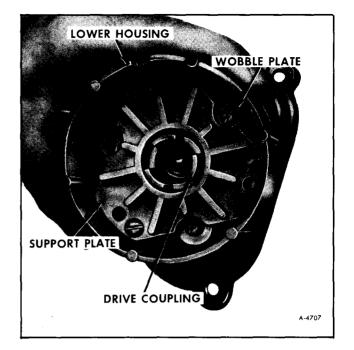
Support Plate, Drive Coupling, and Wobble Plate Assembled in Lower Housing
